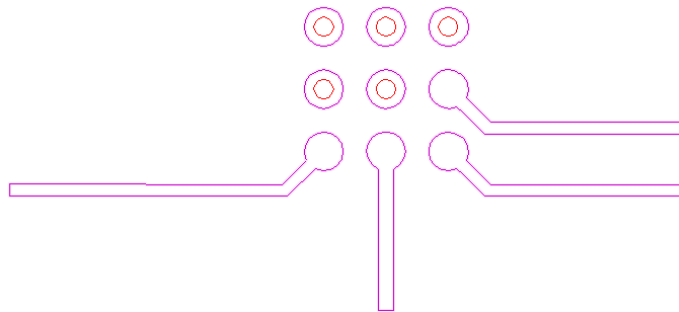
• Suggested Board Layout of Soldered Pads for  $\mu$ C81 CSPs (PCB Lower Layer)
